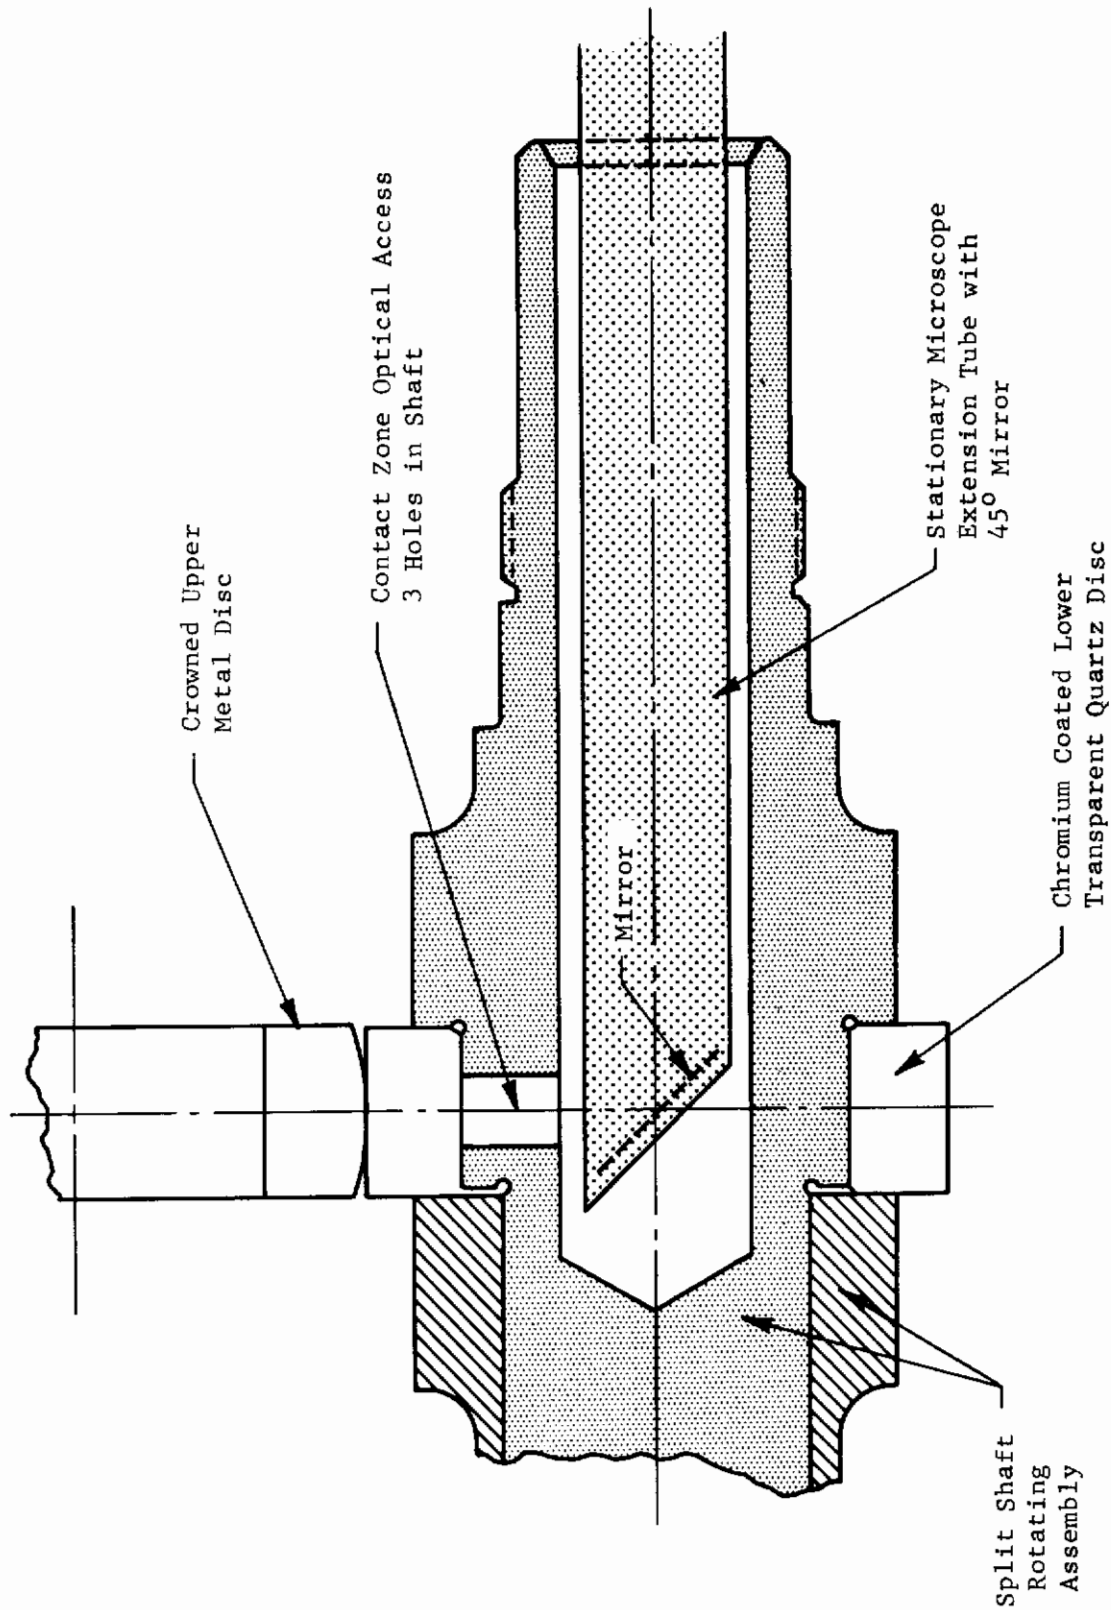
Lower Disc Specimen Shaft Showing Mounting Arrangement and Optical Access.
